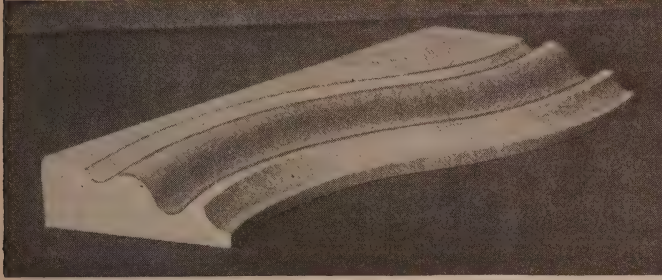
All Hollows Formed and Mouldings Shaped Generally, Ready for Finishing
